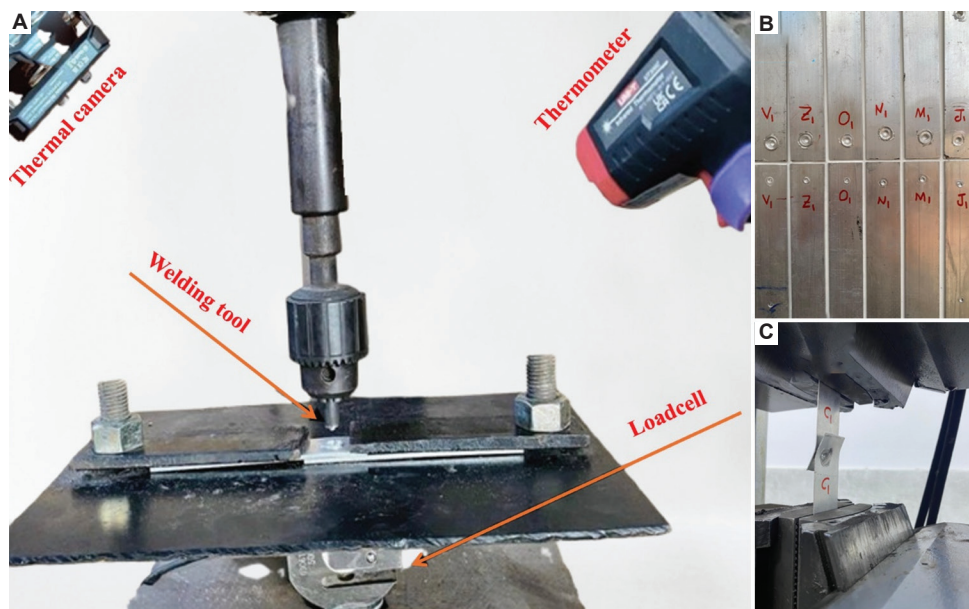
Friction stir spot welding process. (A) Welding arrangements; (B) Welded specimens; (C) Lap-shear tensile test.
